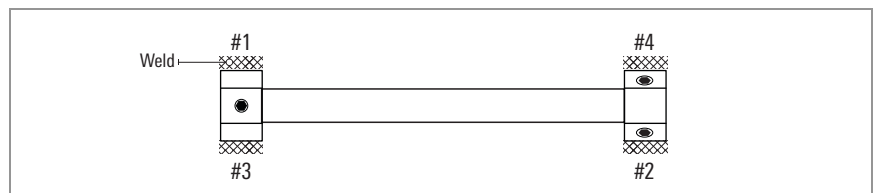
Welding Sequence for the Mounting Blocks
